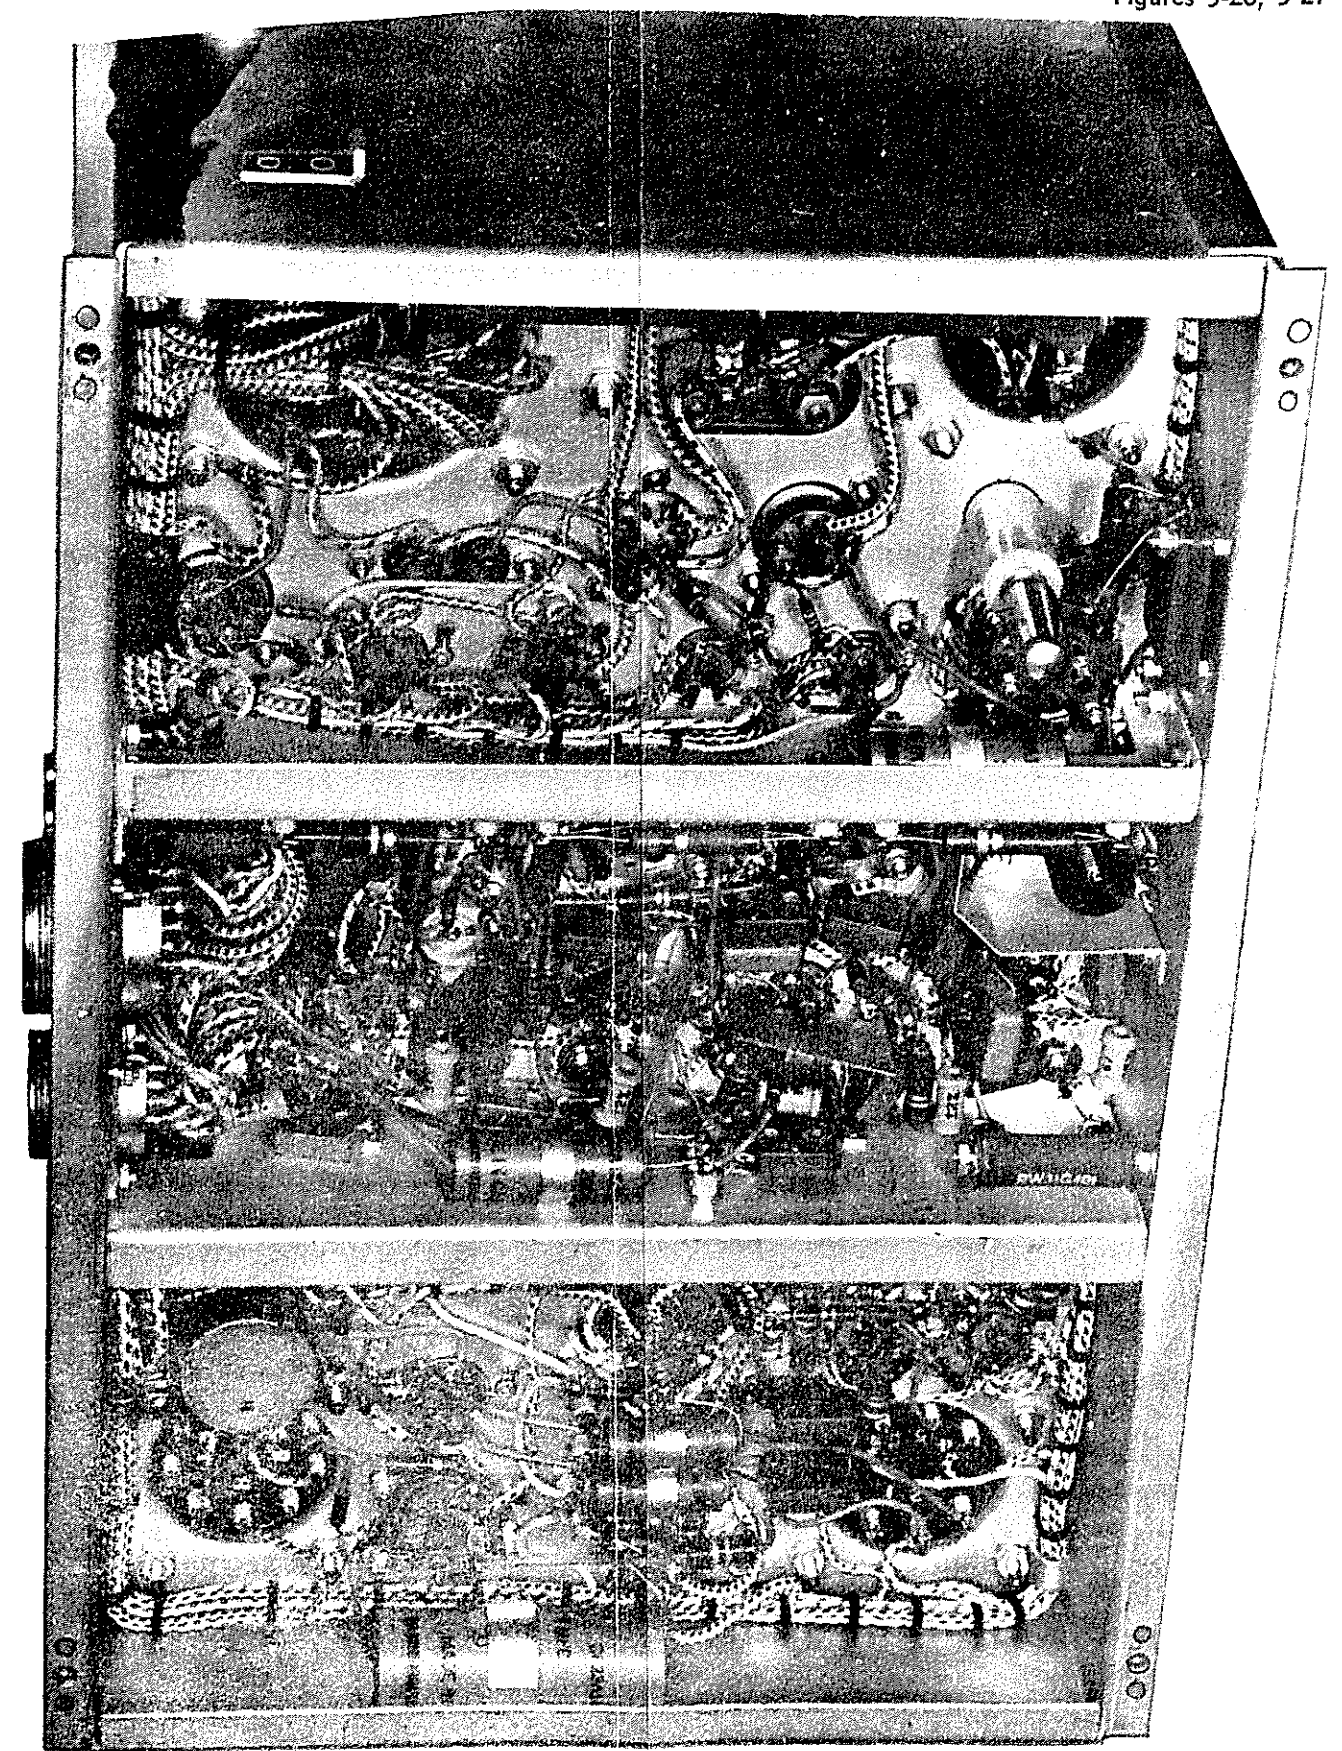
Transmitter Sub Assembly, Right Oblique Rear View, Showing Wiring
